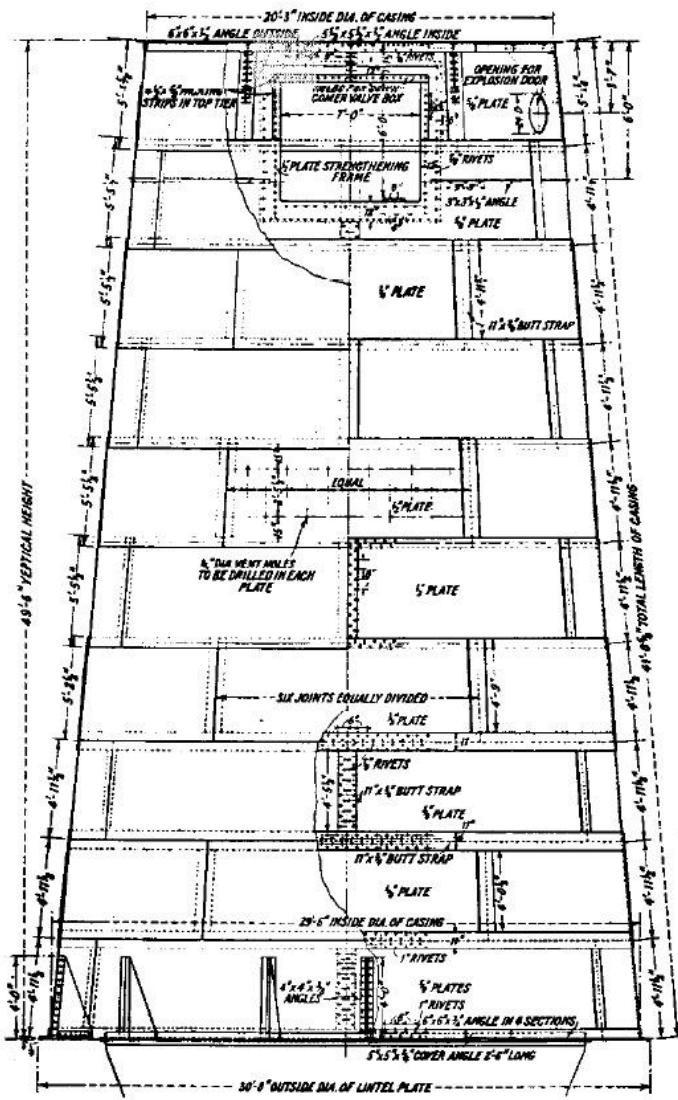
NO. 3 FURNACE CASING DETAILS AT PARK GATE WORKS.
